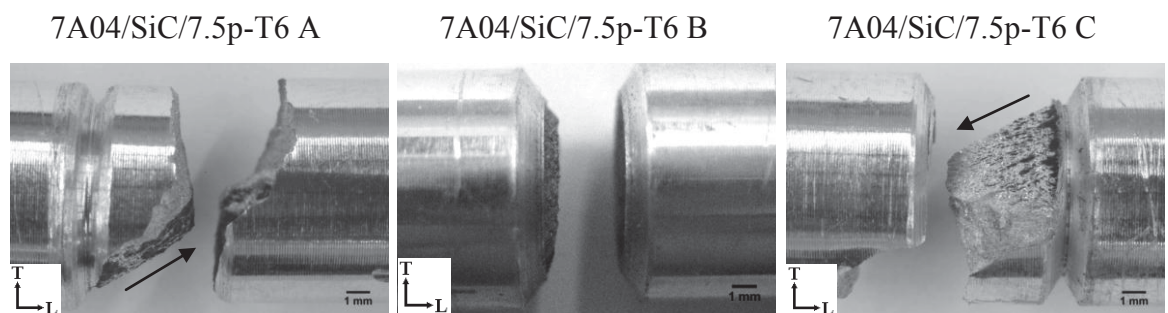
Side view of the circumferential notch tension precrack fracture surface for the 7A04/SiC/7.5p-T6 aluminium materials. The letters A, B and C are used in this section to designate the test specimens.
